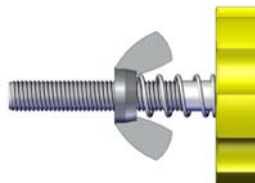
Install the spring and wing nut then tighten until the spring is half compressed
